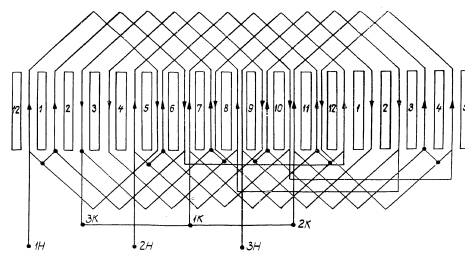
Arrangement of Windings in Gyro Motor Stator Grooves
